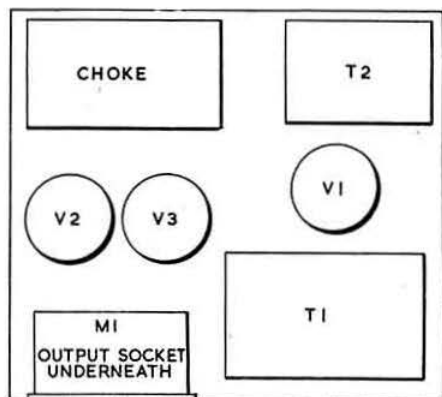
Suggested layout for the general purpose power supply. The chassis measures 9 in. by 8 in.
